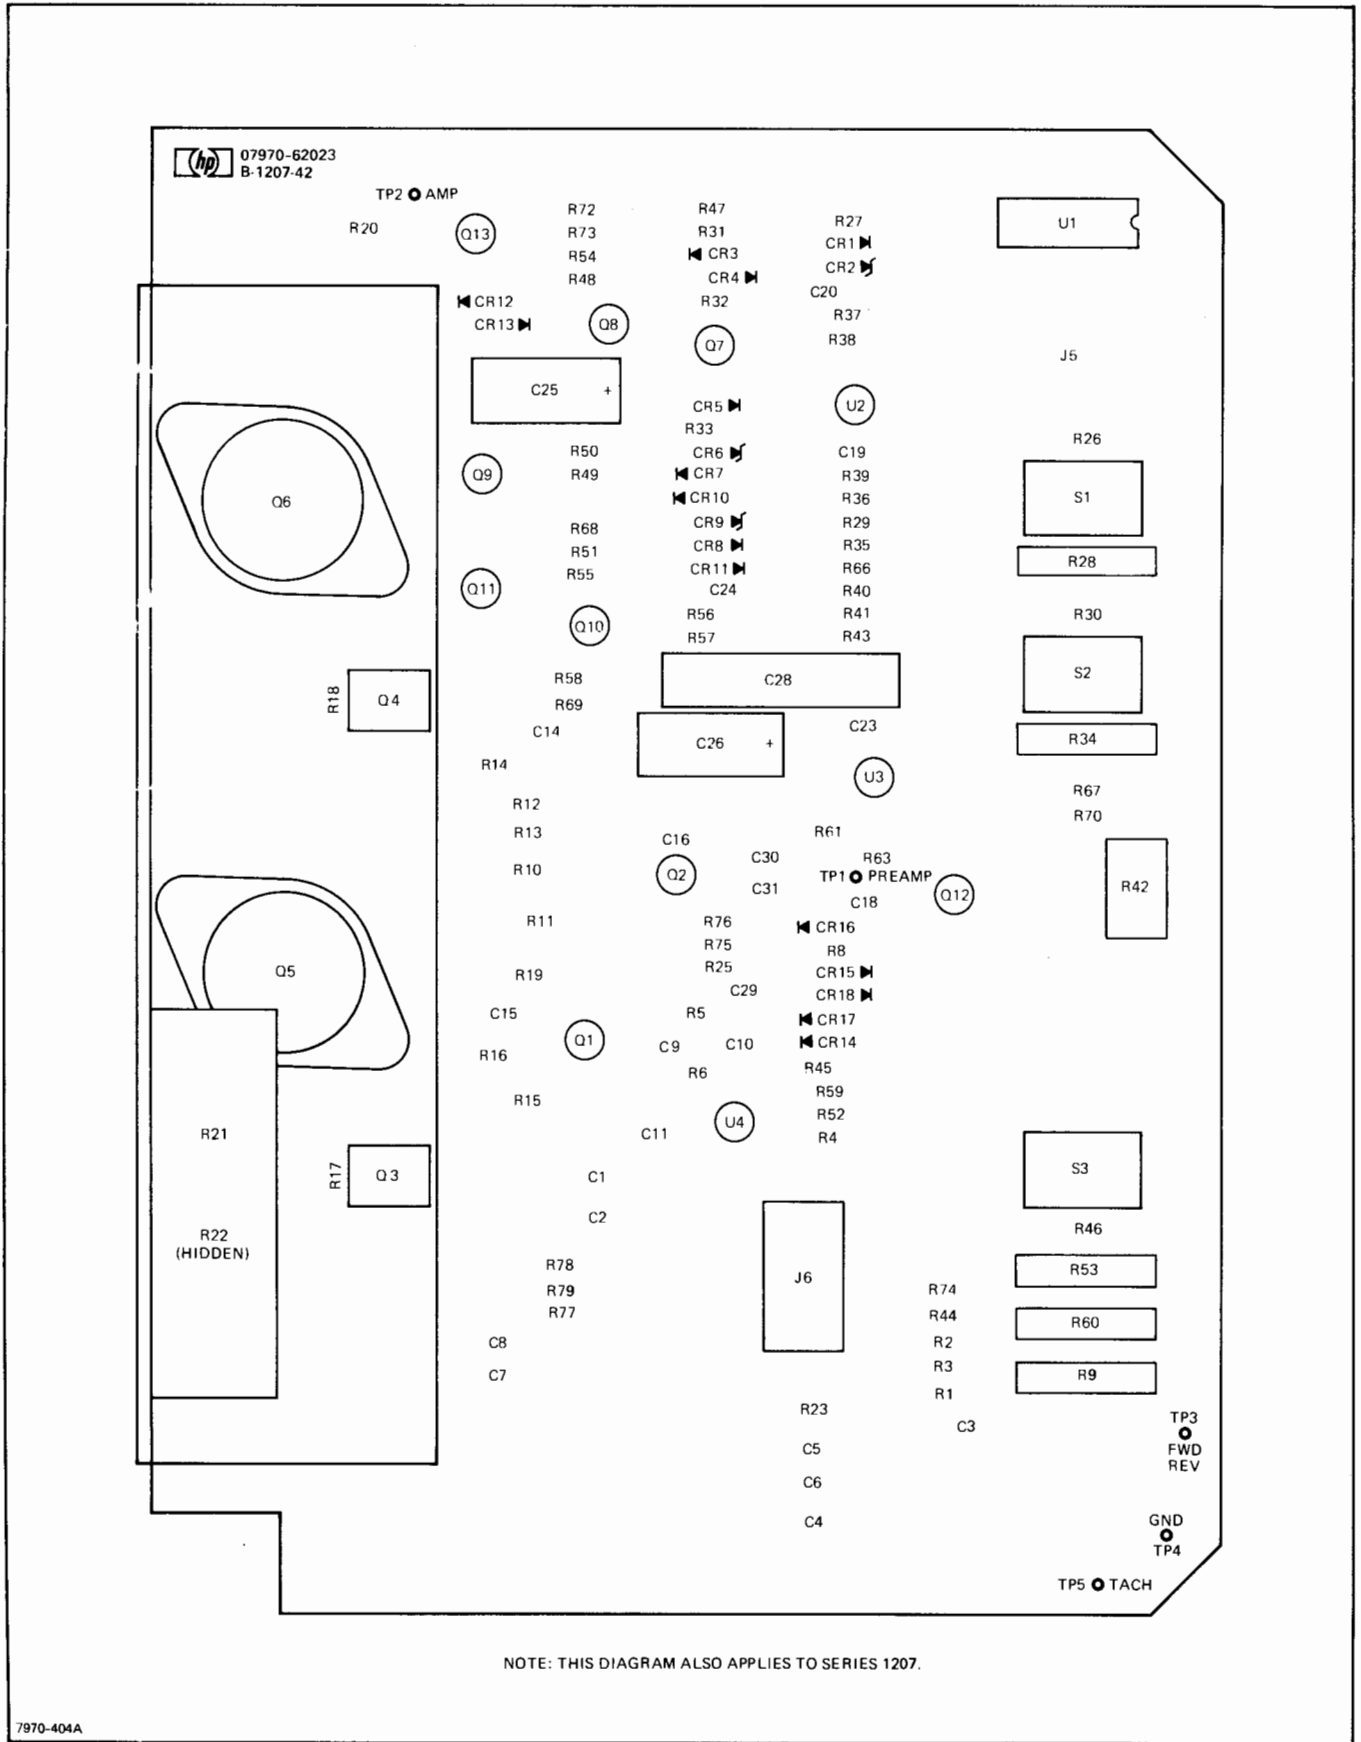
Capstan Servo PC Assembly A6, Parts Location Diagram
